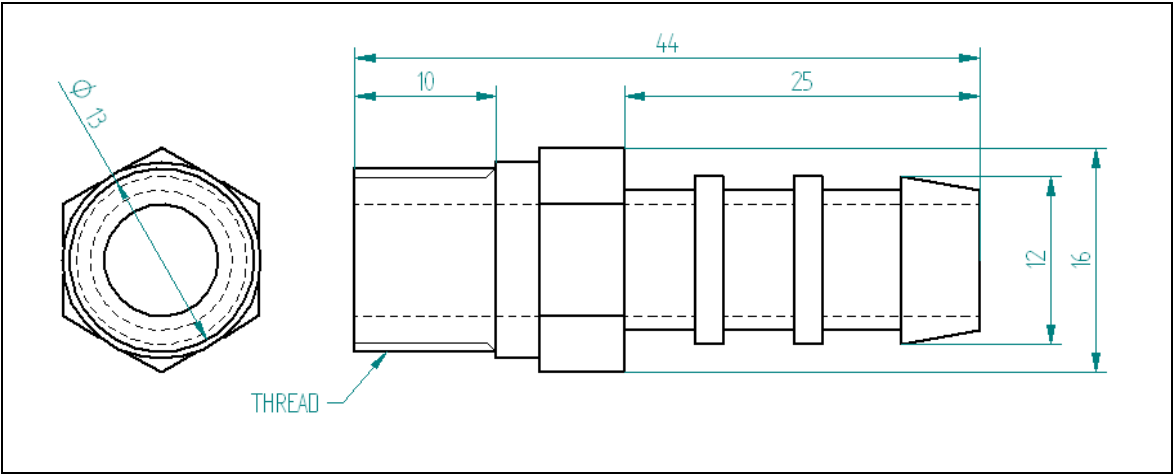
Critical dimensions for the air connector required to fit the hot-jacket
